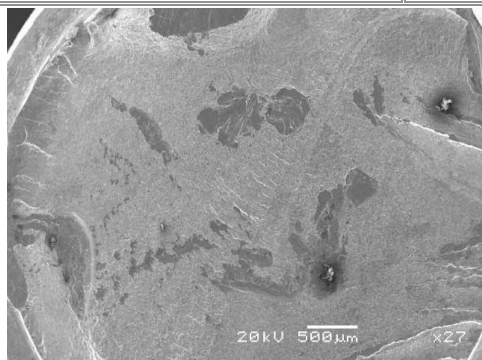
Fracture surface geometry; bolt no 5 (x27, SEM)
